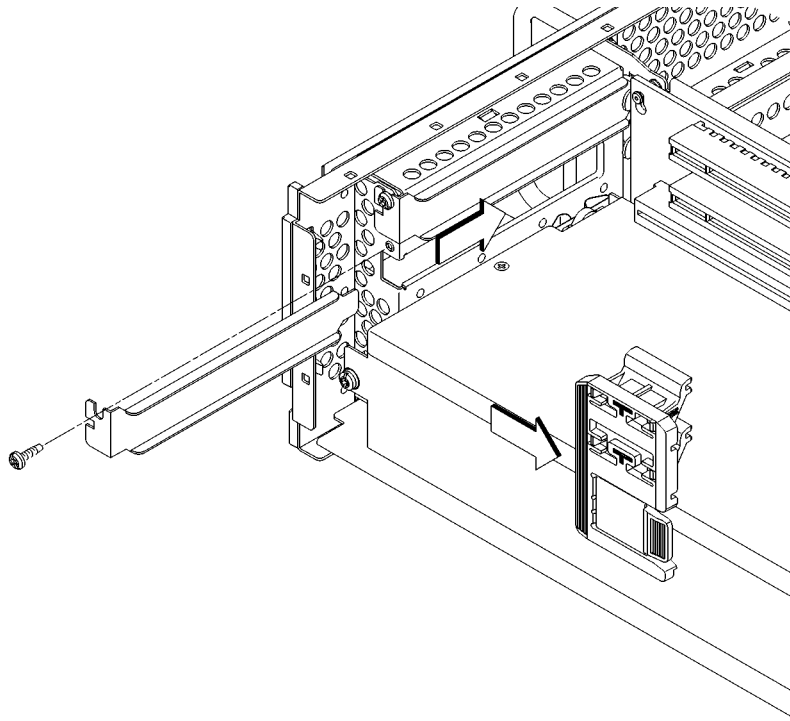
Removing an EISA, GSC, or PCI Option Board
